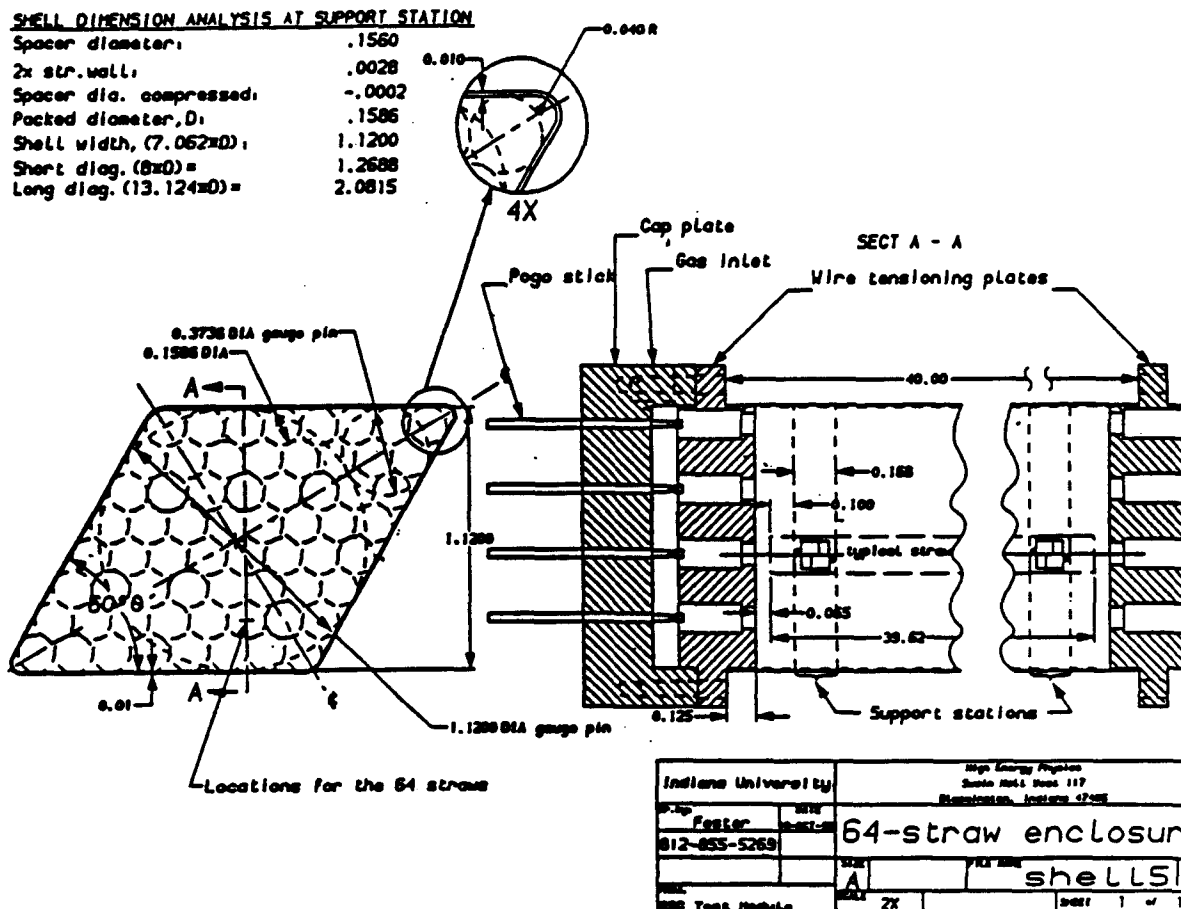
Assembly drawing of the 64 straw prototype module.
